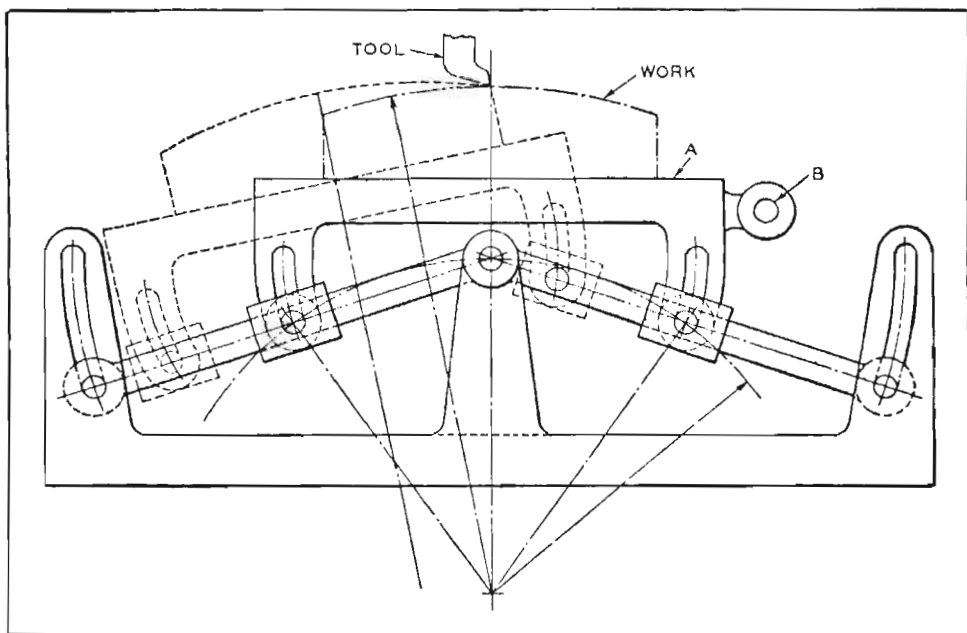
Mechanism Designed for Use in Machining Convex Surfaces of Large Radii.
